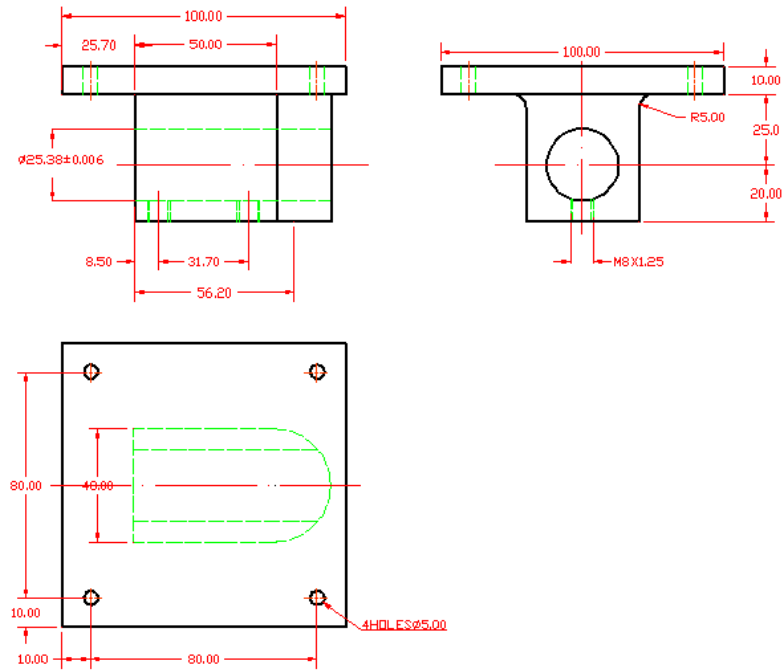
Fixation adapter for connecting sting balance and test rig with dimensions in mm
